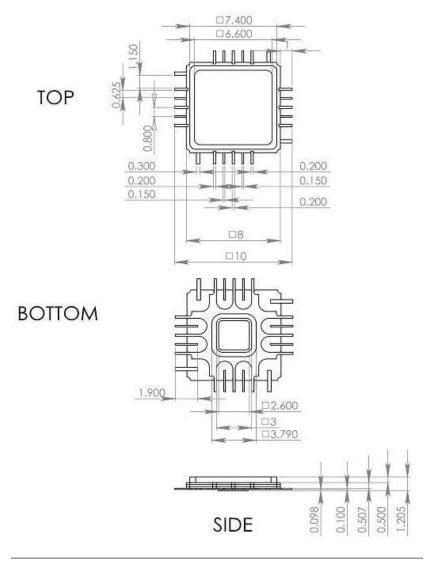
CQFP 24-Pin Package Drawing (All Dimensions in mm)
